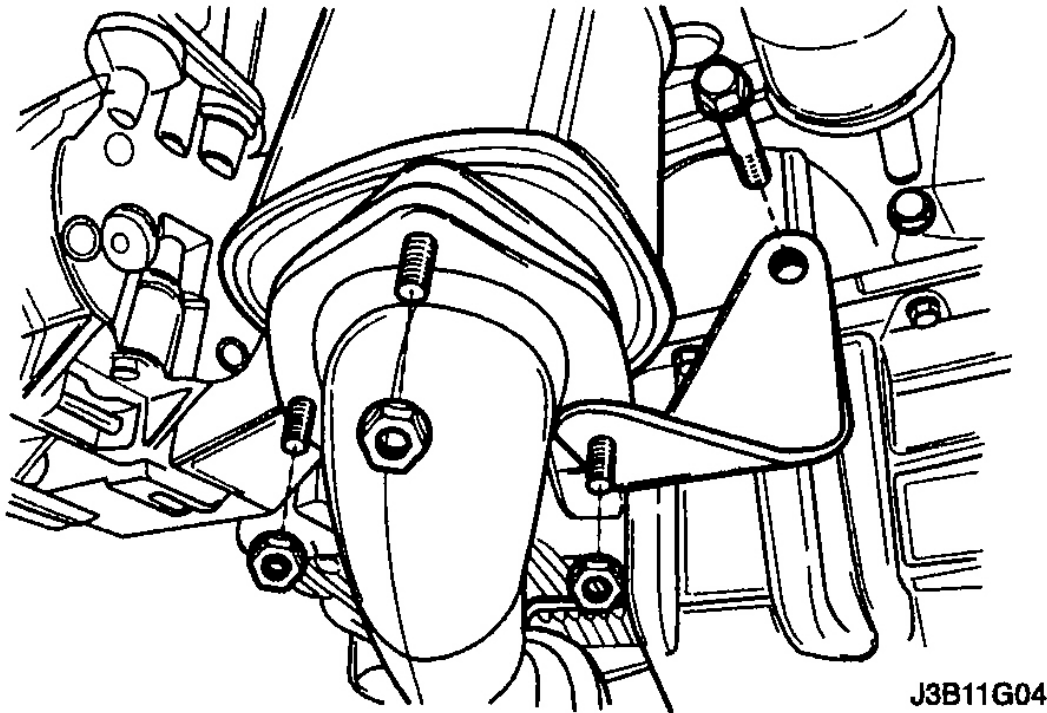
Removing Exhaust Flex Pipe Retaining Nuts
